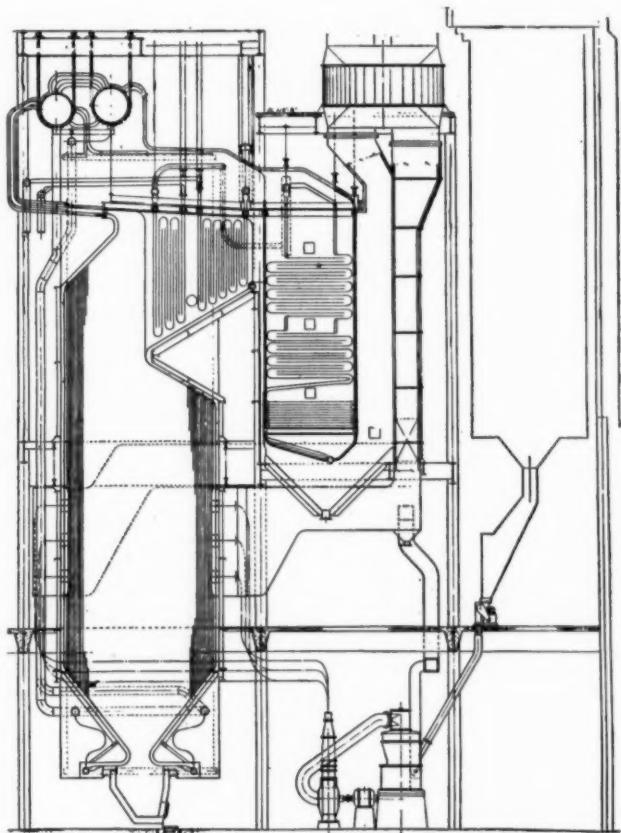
A 585,000-lb per hr unit designed for 1600 psi, 1000 F total steam temperature and reheating to 1000 F
